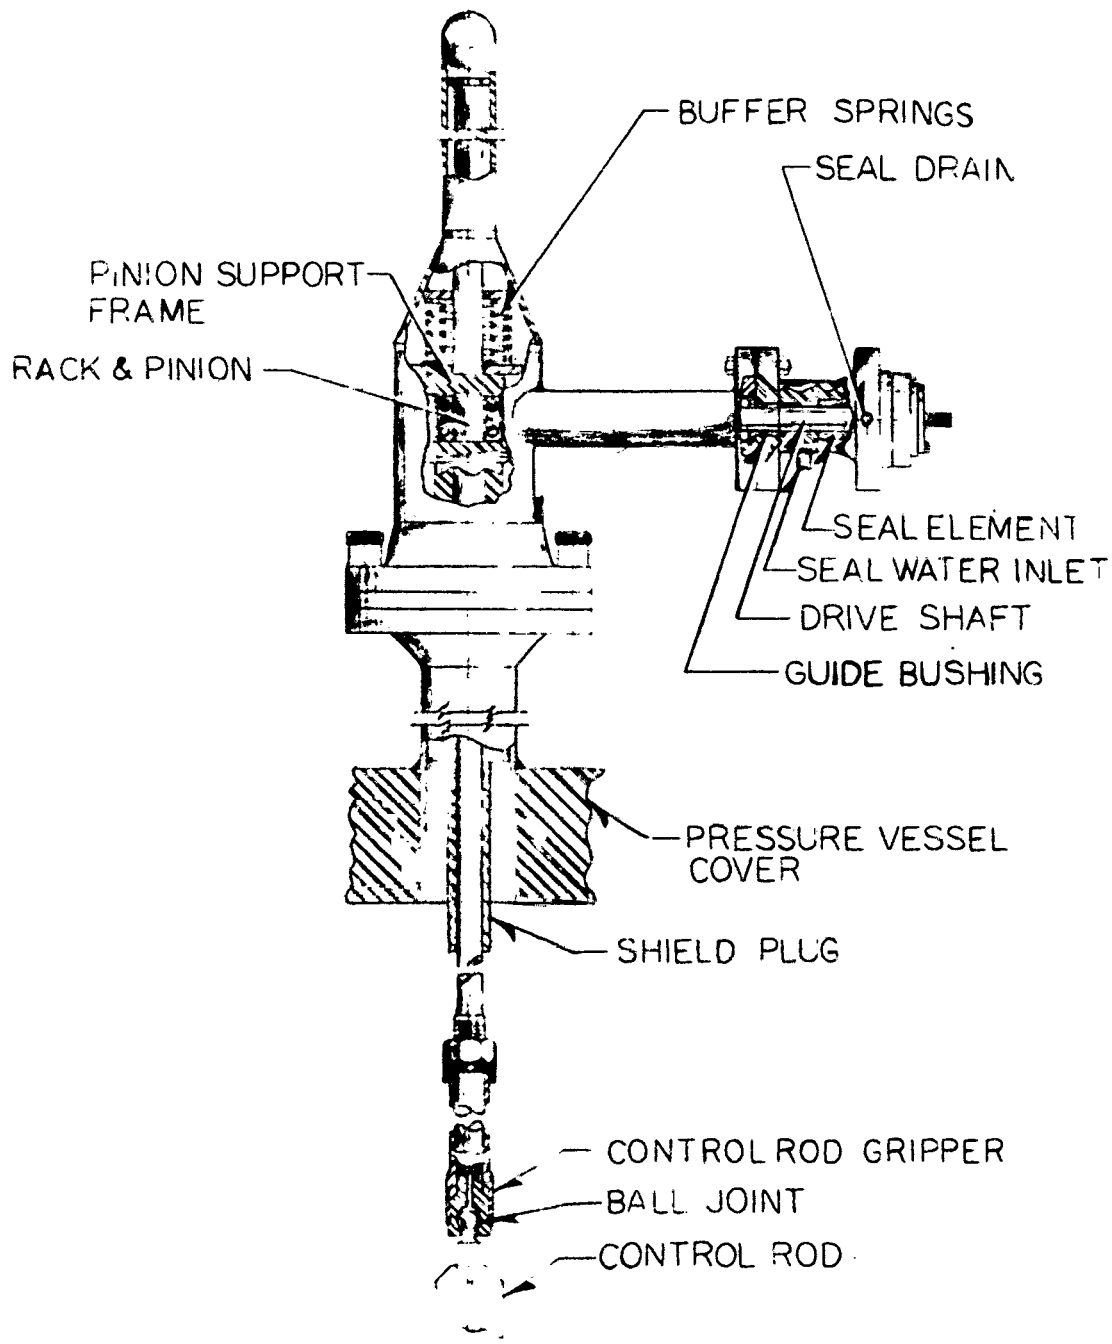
shows the control rod drive mechanism. Vertical linear motion is imparted to the rods by a rack and pinion drive mechanism. The pressure seal on the pinion drive shaft is a positive clearance, labyrinth-type, utilizing high pressure seal water from the feedwater system. Controlled leakage through the seal is bled to the precooler and condensate return tank. A conventional 1/8 hp electric gear motor equipped with a magnetic-disk brake is positively engaged with the pinion shaft by an electro-magnetic clutch. The mechanism is so designed that a scram signal will not only release the magnetic clutch but the drive motor will try to drive the rod down through a unidirectional cam clutch. In the event of a power failure the drive motor current is supplied by the battery powered emergency power supply. Normal rod travel is restricted by mechanical gearing to 2.85 in/min for the side rod and 1.85 in/min for the center rod. The corresponding maximum rate of reactivity addition is 1.5×10^{-4} K/sec.
